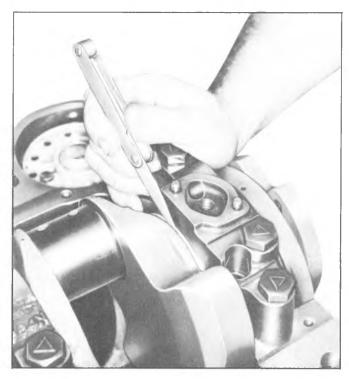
A-53--Measuring Crankshaft End Play (Typical)
